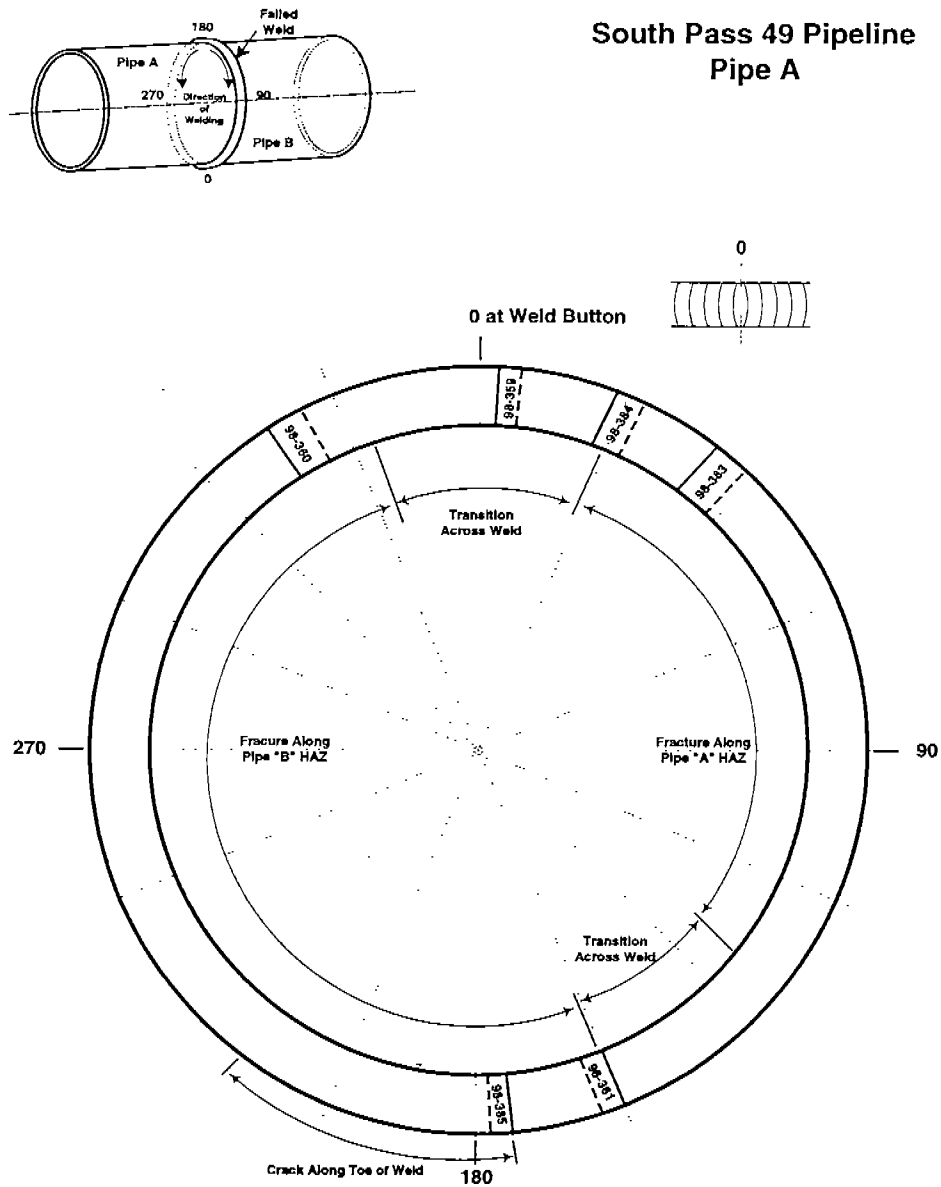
Schematic of pipe "A" side of fracture surface indicating location of fracture, secondary cracks, and metallographic samples.
